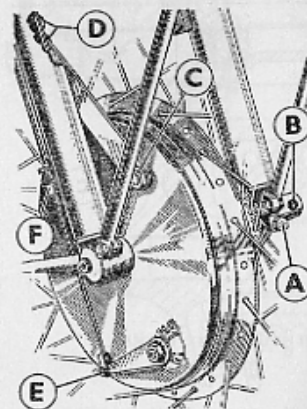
Front Wheel Removal (190 mm. and 8 in.)
